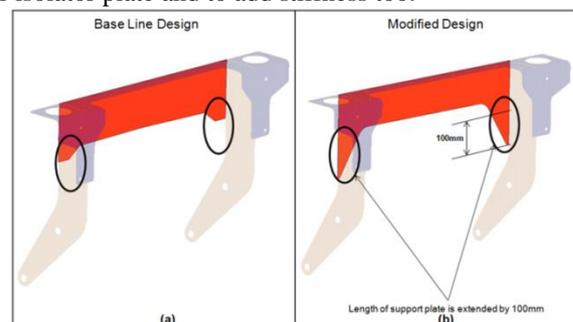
Design Modification - 2 (a) baseline design (b) Modified design
